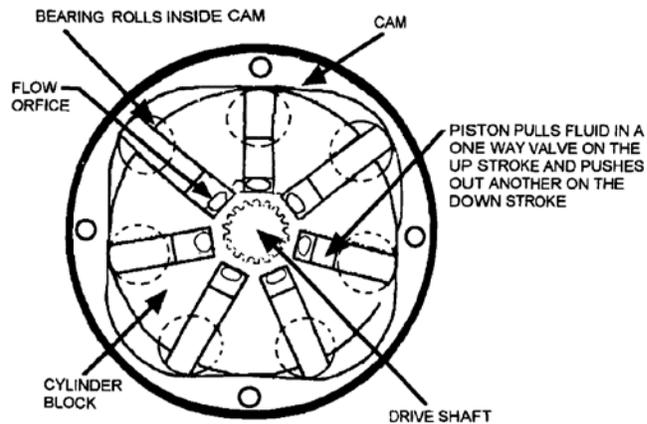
Radial piston type hydraulic motor
